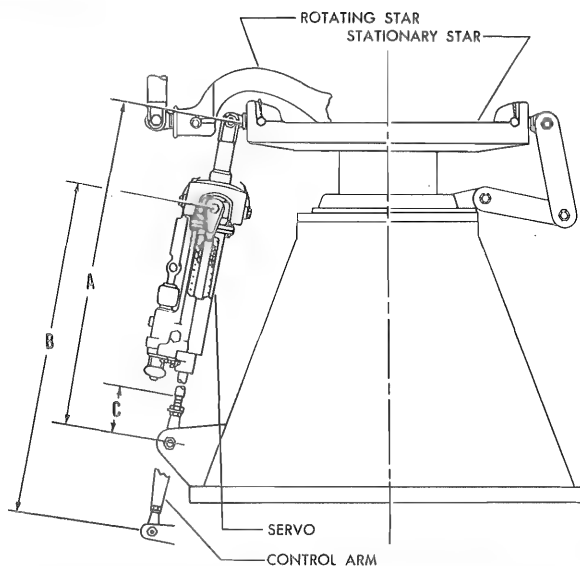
Rigging Dimensions Main Rotor Primary Servo Units
